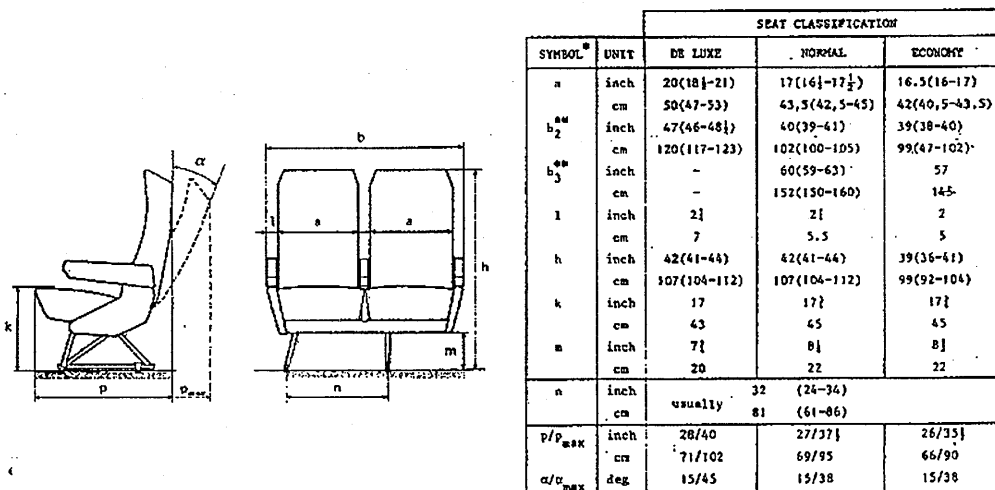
Definitions of seat dimensions (Ref. 2.15)
